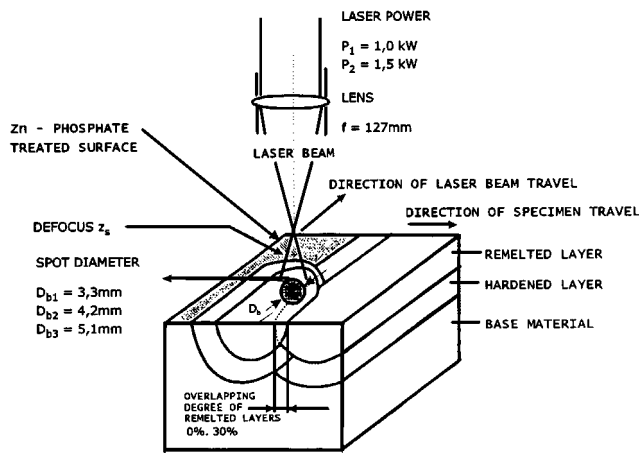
Laser surface remelting conditions and description of modified specimen surface layer
